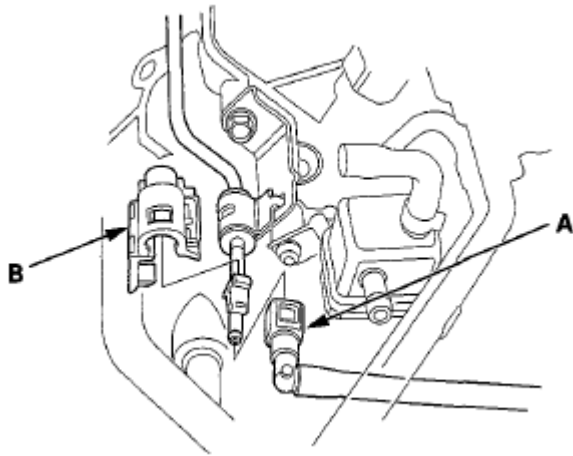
Identifying Fuel Feed Hose & Quick-Connect Fitting Cover
